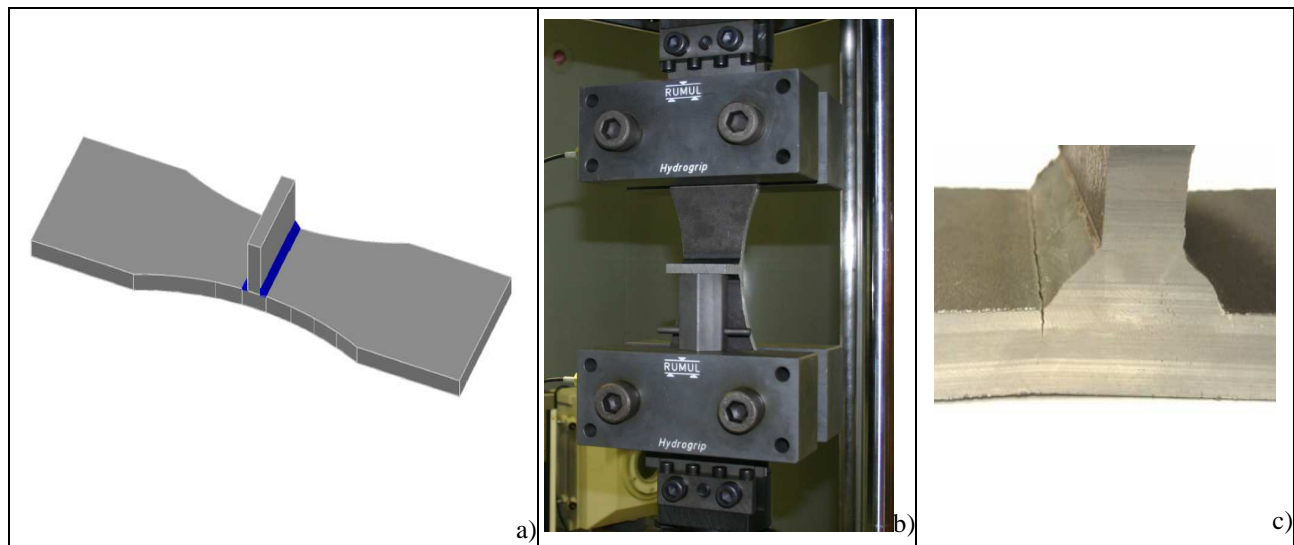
a) Geometry of specimens; b) Hydraulic fatigue test machine; c) Crack at weld toe of one of specimen
